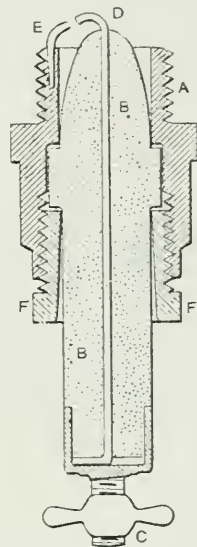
DE DION-BOUTON IGNITION PLUG
